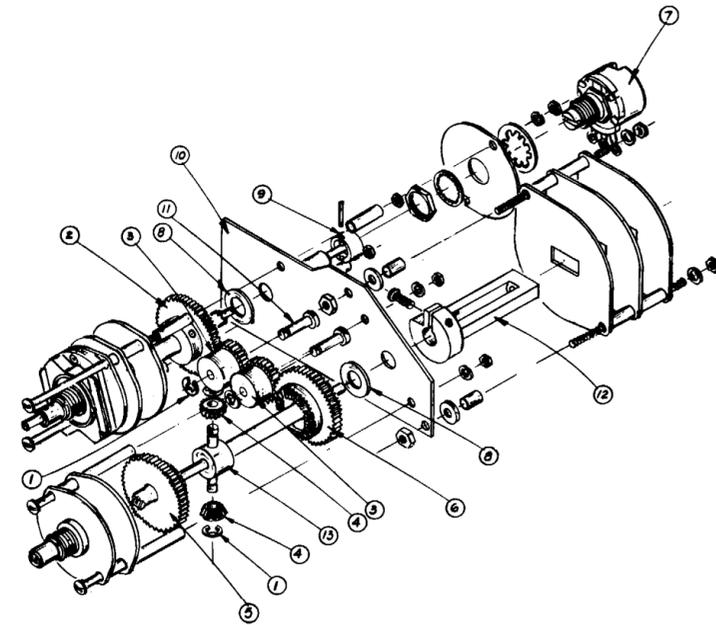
A9 Peak Deviation and Range Switch Assembly Illustrated Parts Breakdown
